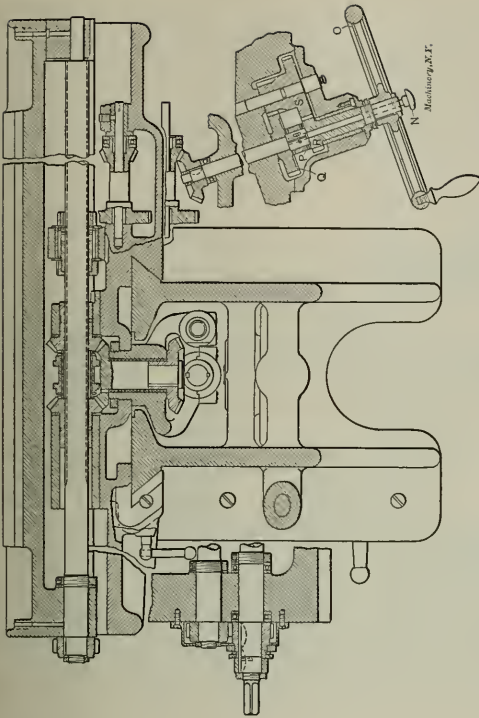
Details of Table Feed and Hand-wheel Gearing.
